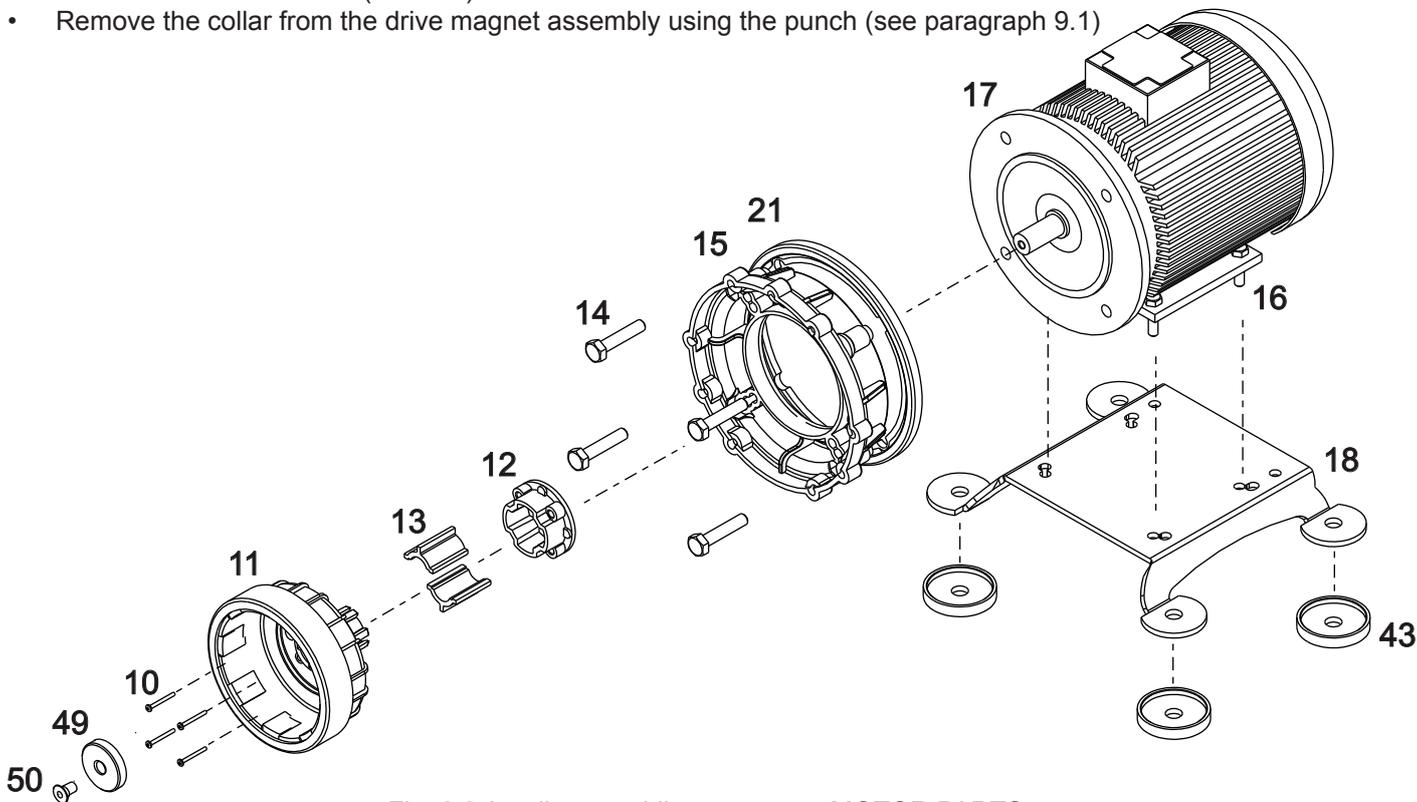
A – disassembling sequence MOTOR PARTS
